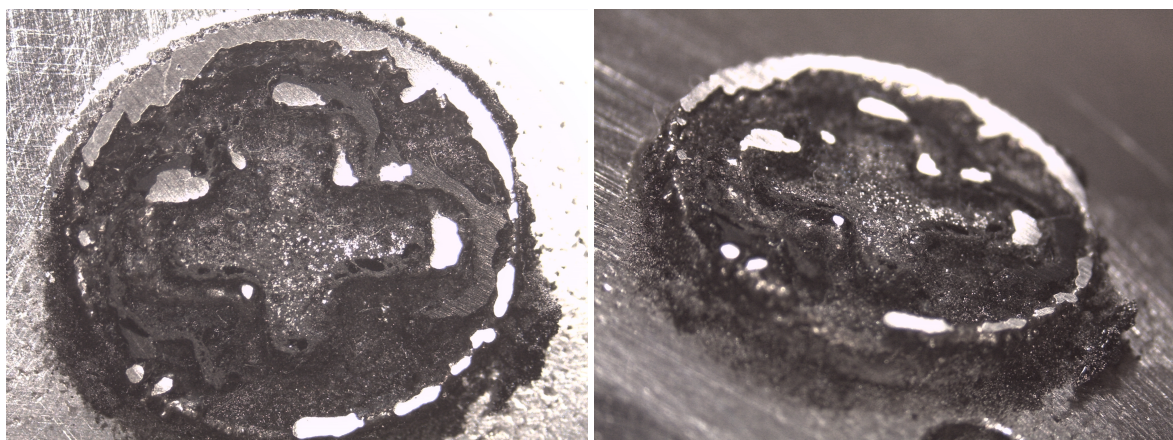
Multi-laser – bi-material manufacturing test: EM analysis
